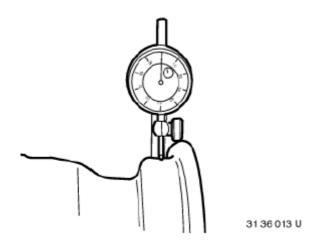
Identifying Dial Gauge Sensor On Rim Shoulder Courtesy of BMW OF NORTH AMERICA, INC.
